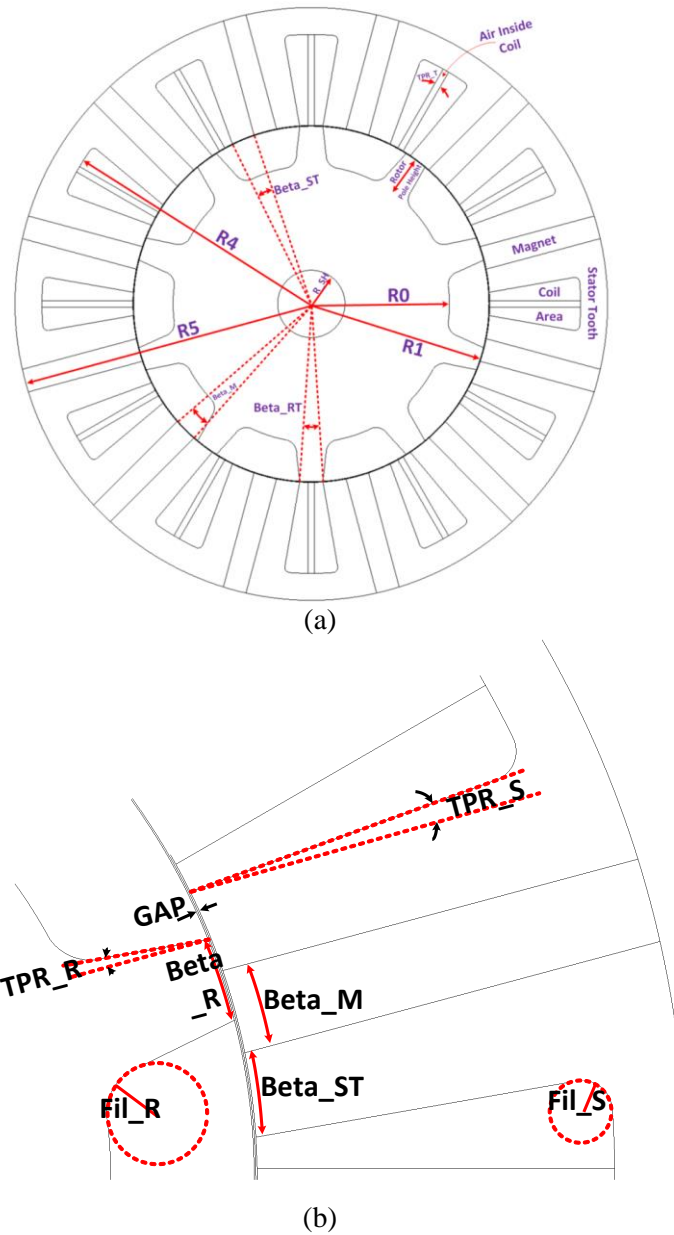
Geometric parameters of the FSPM designed (a) whole machine, (b) closer view of one stator and one rotor pole.
